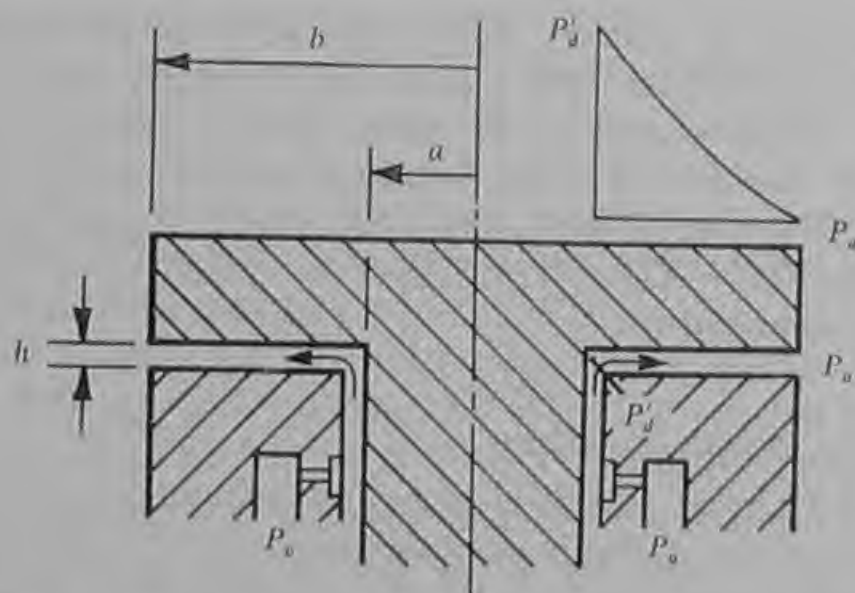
Thrust bearing fed by journal bearing exhaust
